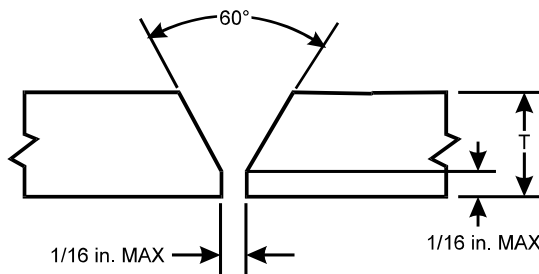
Tubular Groove Weld — Performance Qualification — Without Backing (see 5.21.3)
